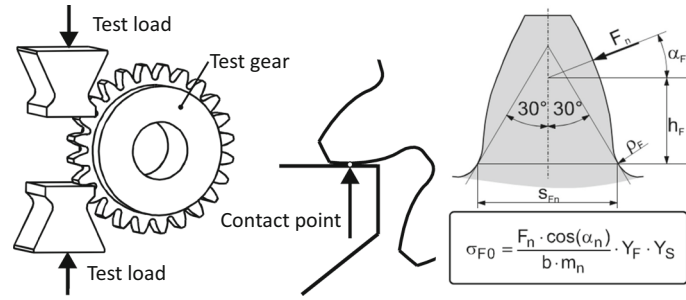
Clamping of the gear in the pulsating test rig and calculation of nominal tooth root stress σ_{F0} according to ISO 6336-3 and DIN 3990. [10]
